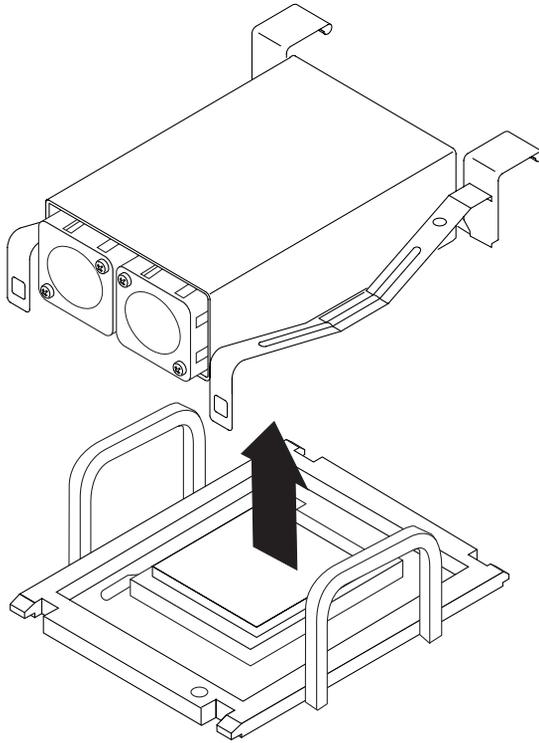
Lifting the Heat Sink From the CPU Socket
